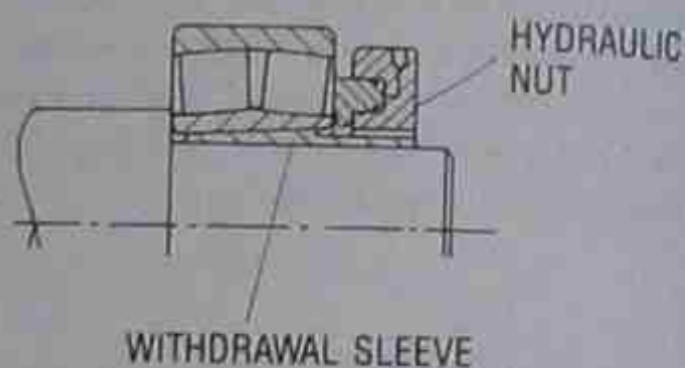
Using a hydraulic nut to remove a withdrawal sleeve.
